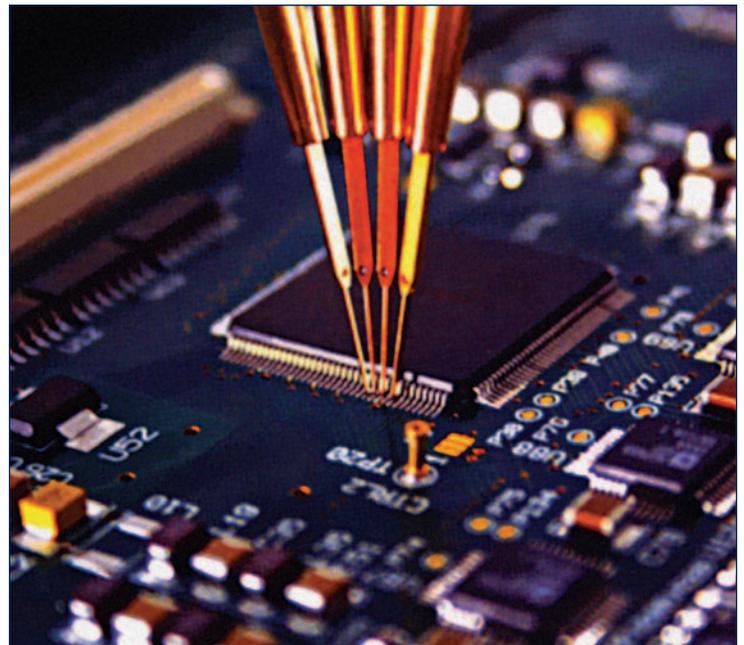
The probes are moved with three-axis, high powered linear motors to achieve electrical contact with the component under test. Photo courtesy of SPEA.
